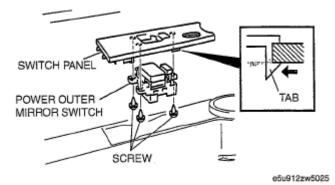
Power Outer Mirror Switch Remove/Install Components Courtesy of MAZDA MOTORS CORP.
